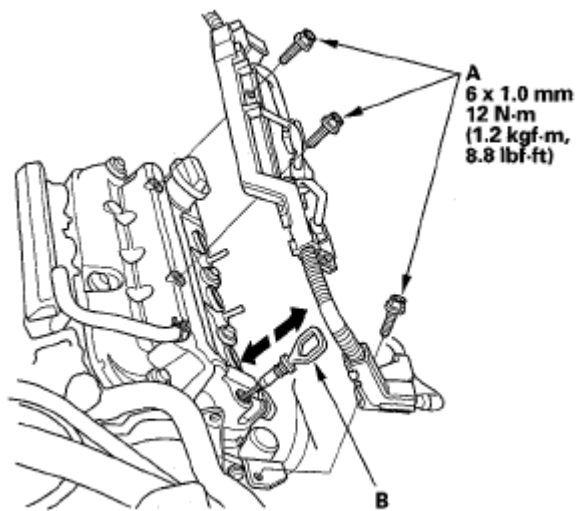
Identifying Harness Holder, Dipstick And Bolts With Torque Specifications
